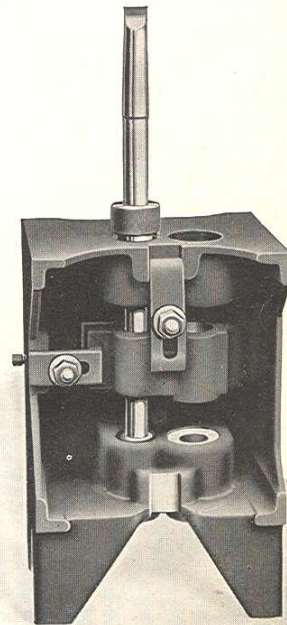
Jig for boring Lead Screw and Feed Rod Bearing.
